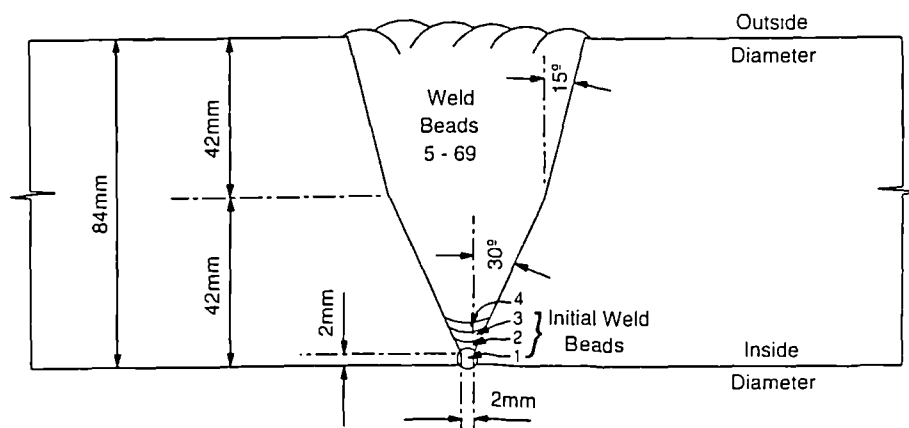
Schematic of the weld geometry of pipe fig. 2.14 from Bonner [1996].
